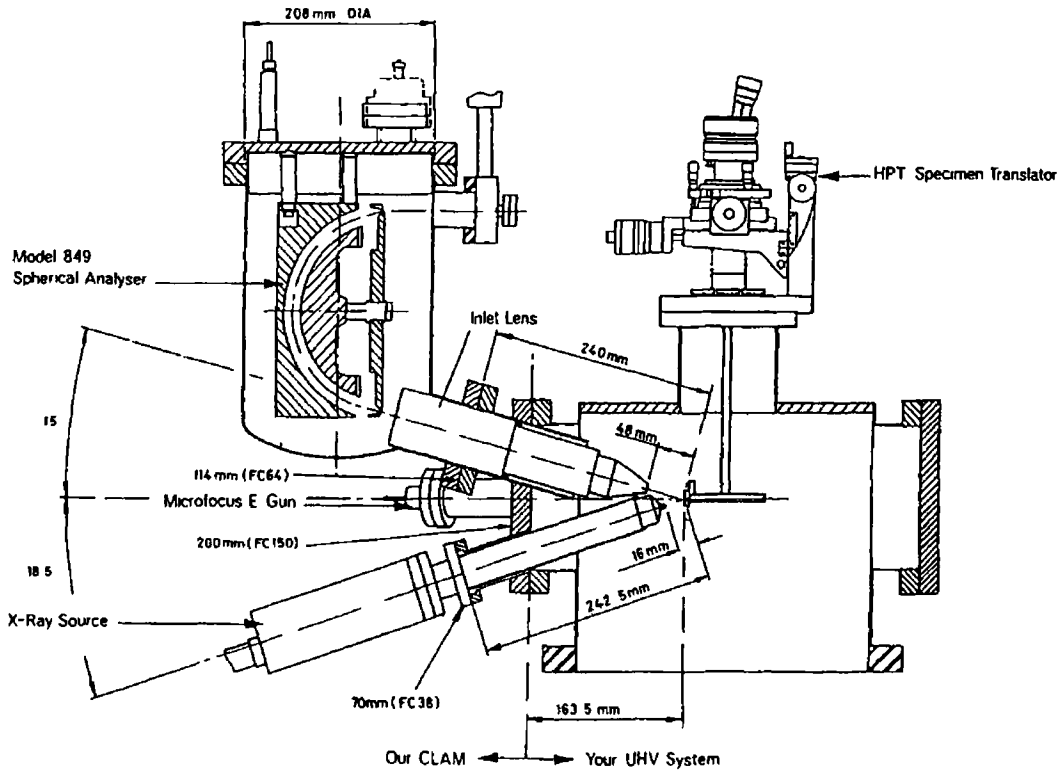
6 Dimensions for Clam mounted on 200mm OD adaptor flange [6]
